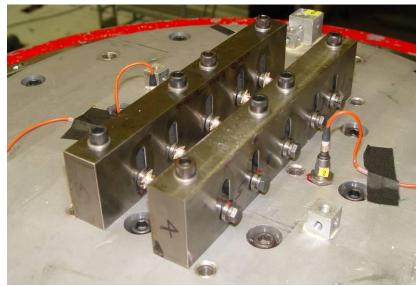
TEST FIXTURES MOUNTED ON VIBRATION TEST TABLE
